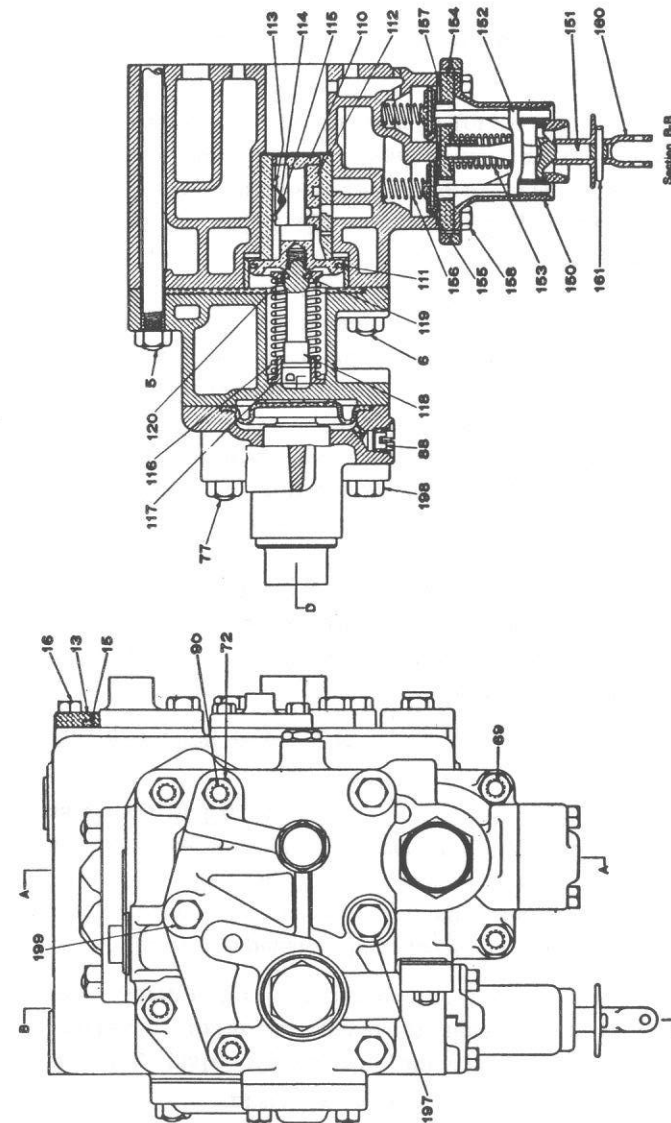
Release Piston and Slide Valve, and Duplex Release Valve Assembly.
